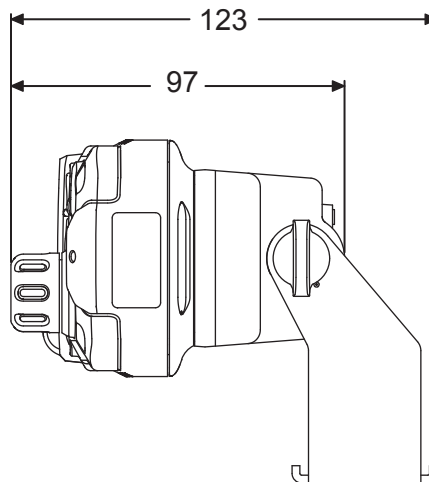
Front View of O5 Control Head with Remote Mount and Trunnion
